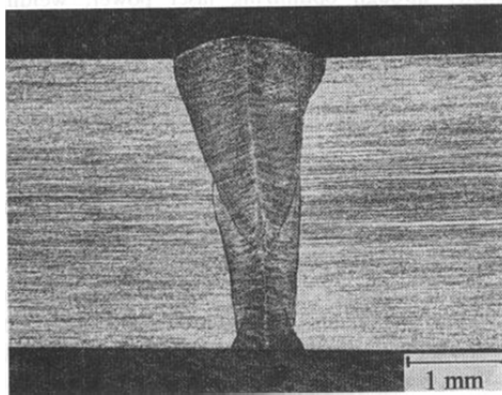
Optimum weld profile of type 304L stainless steel obtained using helium as a shielding gas instead of argon with the same laser parameters as of Figure 15.
